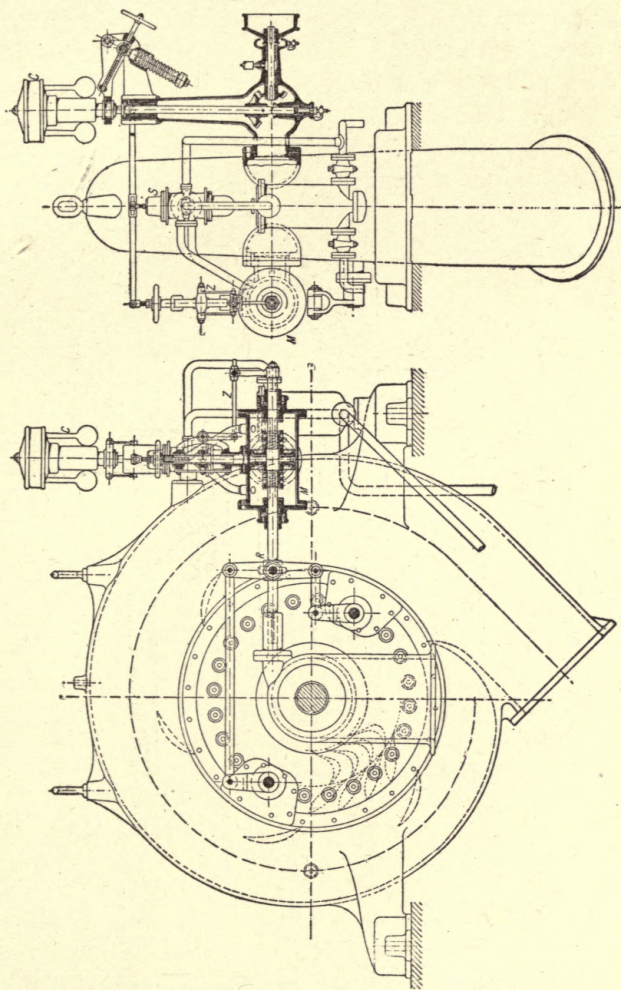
and 29.—200-H.P. Turbine. Built by Escher, Wyss & Co., Zurich, Switzerland.
